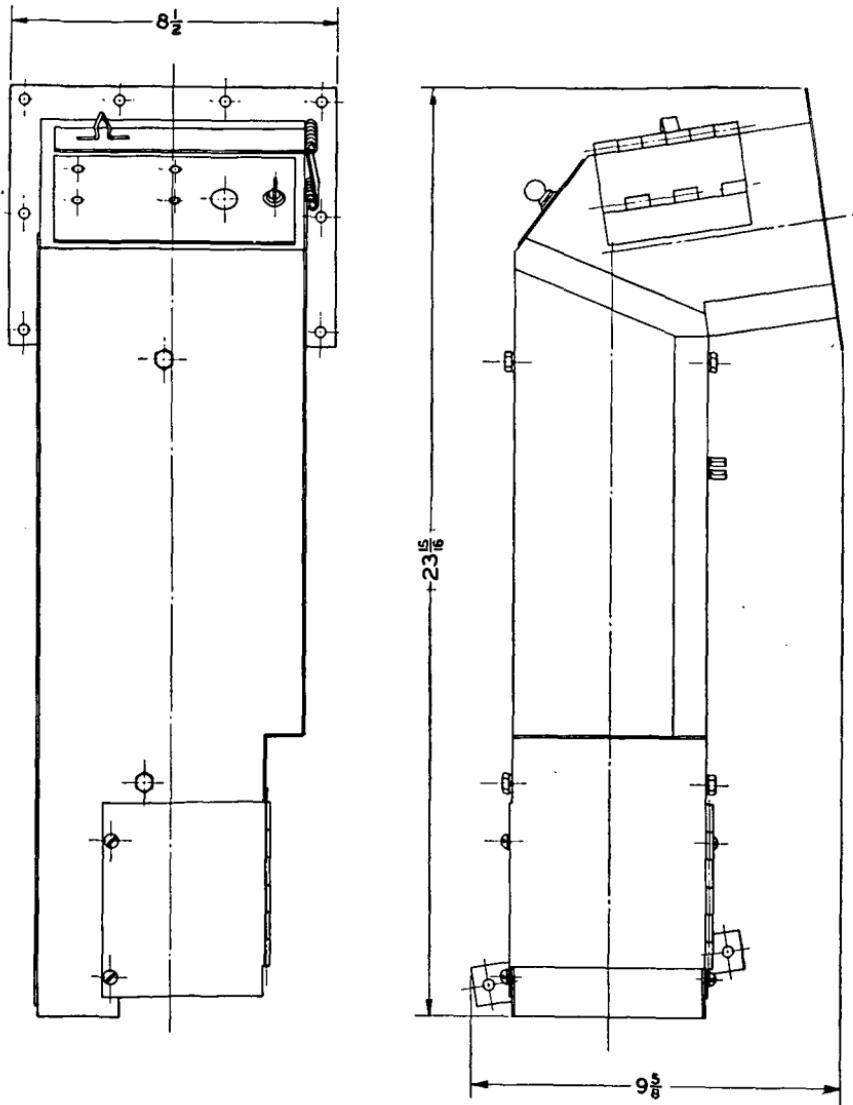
Dimensional sketch of auxiliary generator duct.
